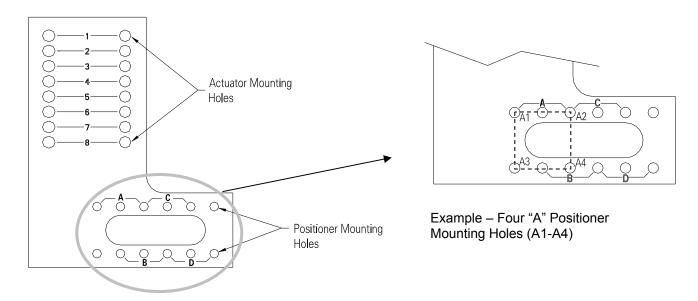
Multi-Mount Plate, Positioner Mounting Holes
